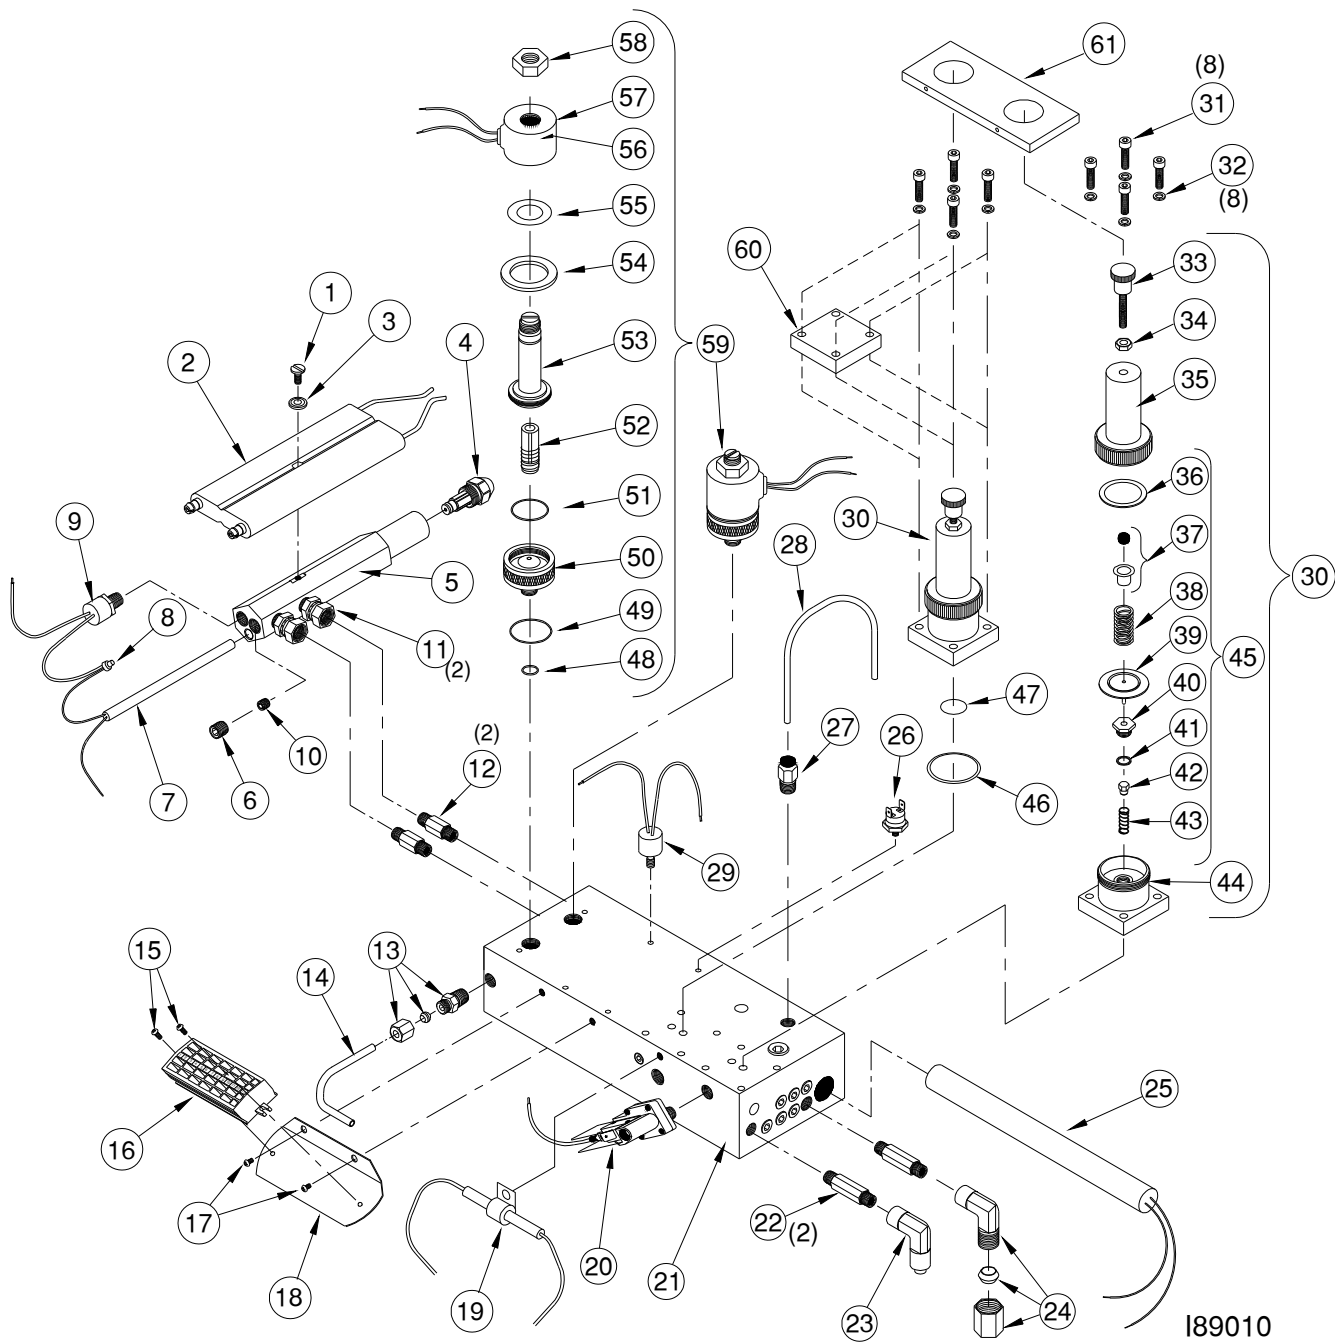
CB-551-H5 CE 5W Preheater Block and Electrode Assemble Component Detail
